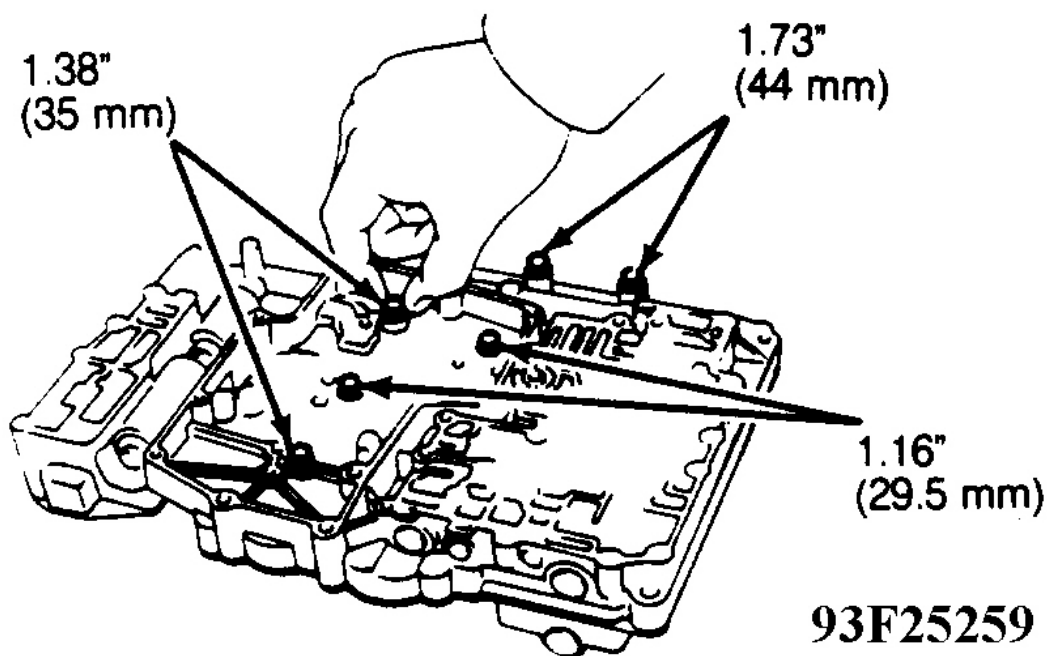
Locating Valve Body Bolts (1 Of 3)
